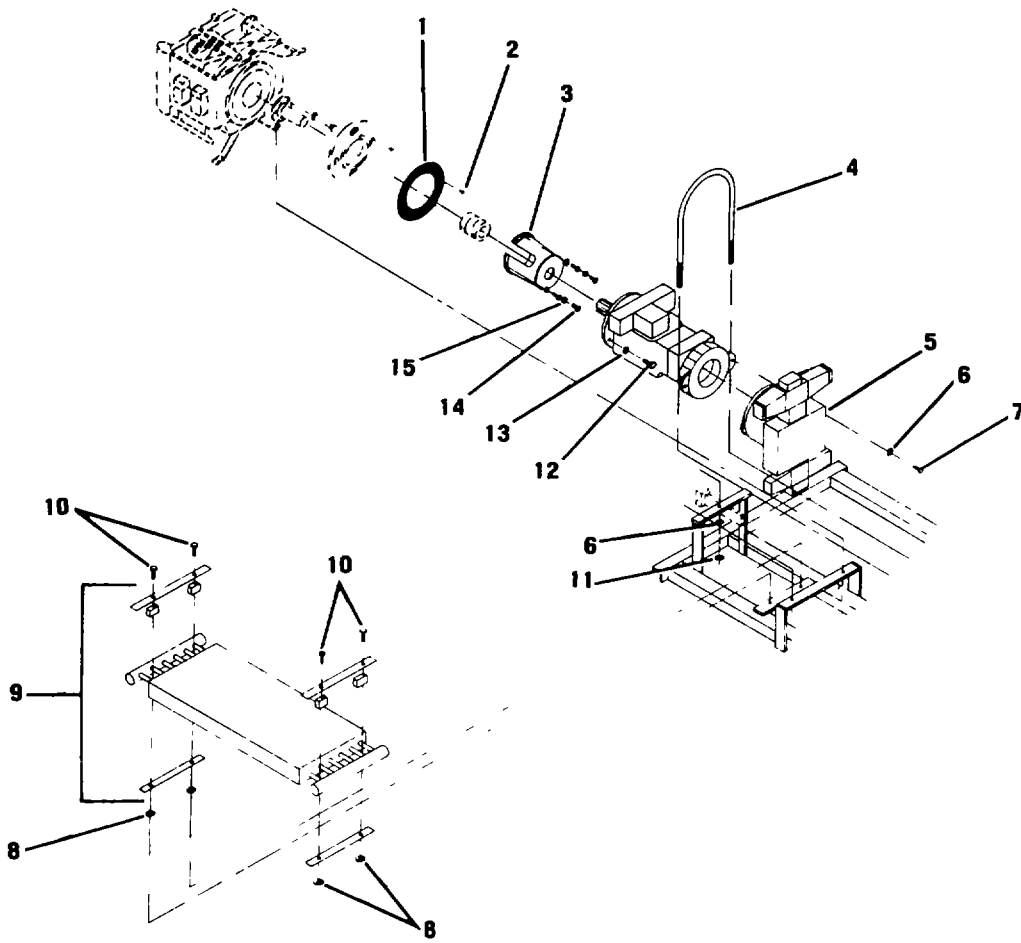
Transmission Oil Cooler and Hydraulic Pump
